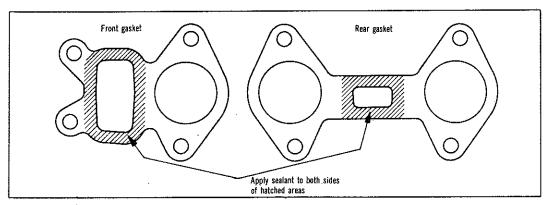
Intake manifold gasket sealing points—early type gasket shown.
